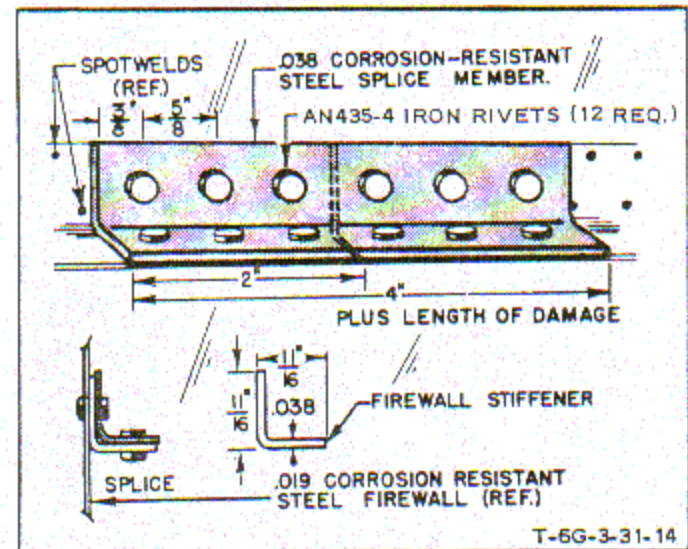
Fire Wall Wide-Flanged Stiffener Splice
